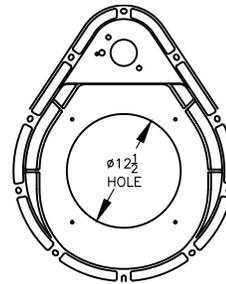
Burner Mounting Plate and Burner Adapter Plate
